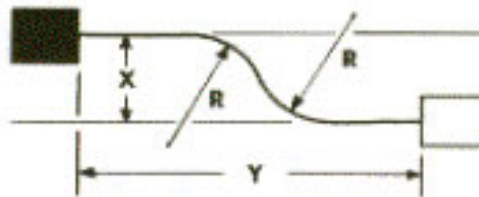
Dimensioning the Rotary Flex Shaft⁵
